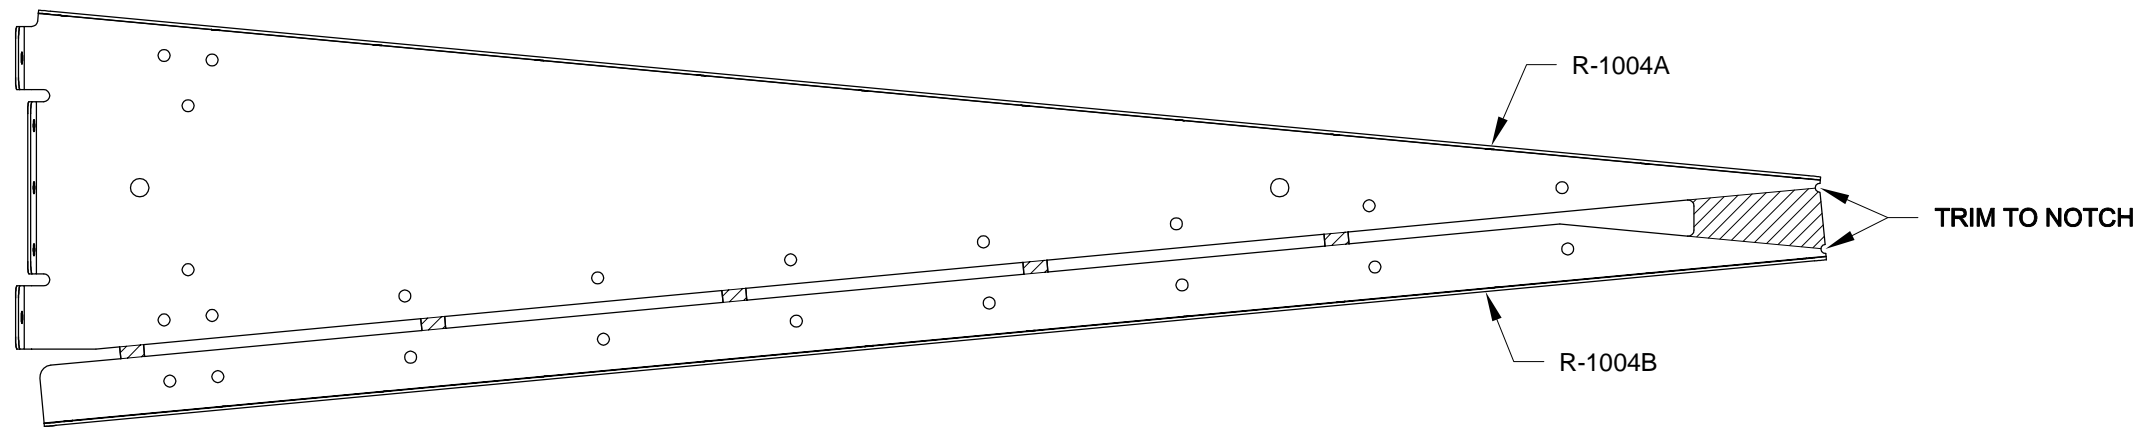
BOTTOM RIB PARTS SEPARATION
